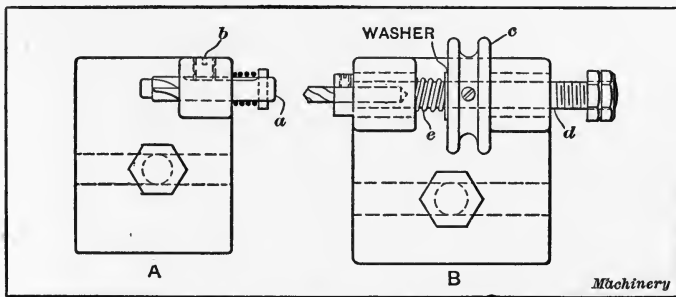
Holders for Carrying Drills and Counterbores on the Cross-slide
